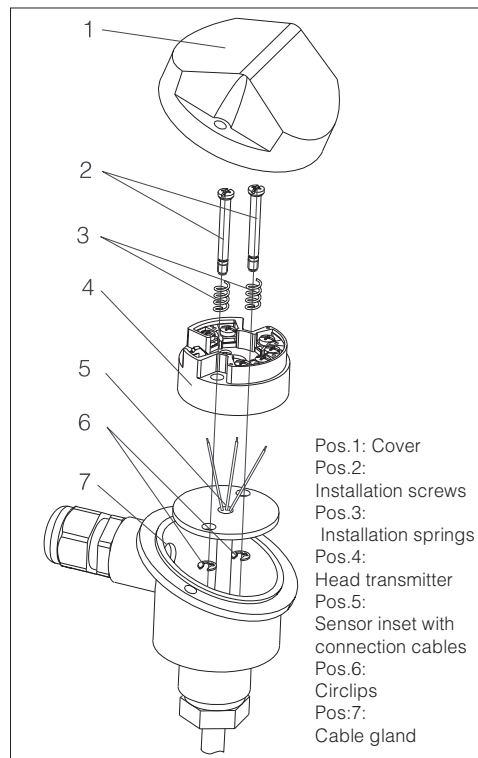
Installation of head transmitter into a Form B sensor connection head.
